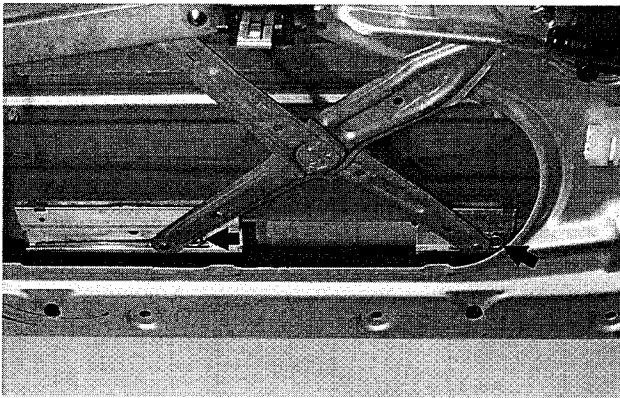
To remove rear window limit stop bracket, remove bolt A and loosen clamping bolt B.
